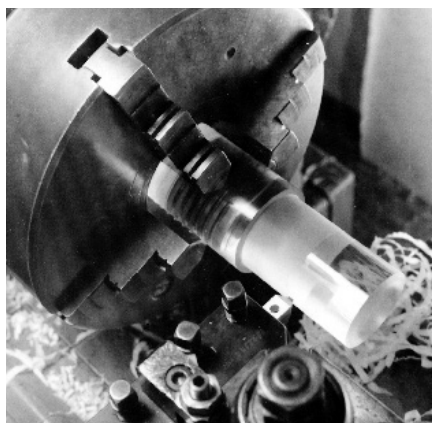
Workpiece pretreated with HSS tool and then diamond-polished
